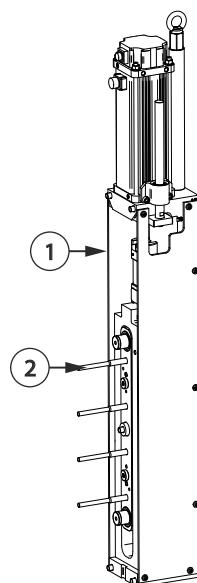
Side Mounted Cam Driven Actuation Assembly
